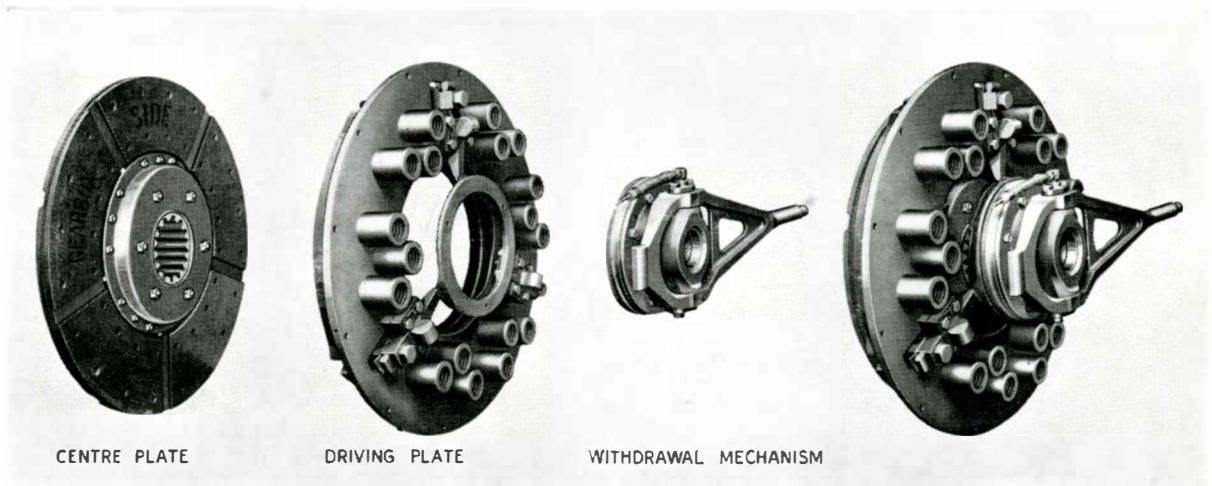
CLUTCH SUB-UNITS VIEWED FROM GEARBOX SIDE
